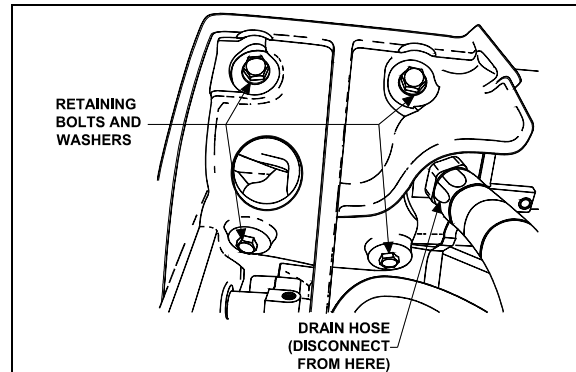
ALTERNATOR RETAINING BOLTS AND WASHERS 06350
